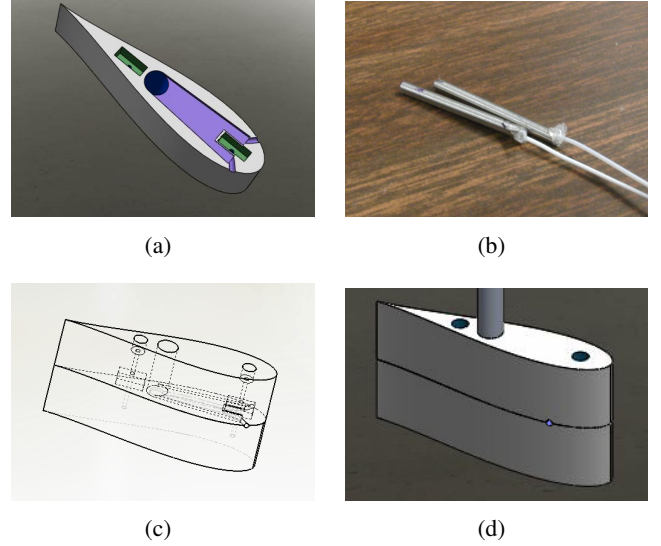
a) CAD drawing of bottom half of the fish robot; b) steel sensor isolation tubes; c) the internal features of the fish robot; d) assembled robot. Tape was applied to the seam for smoothness, except at sensor port holes.
